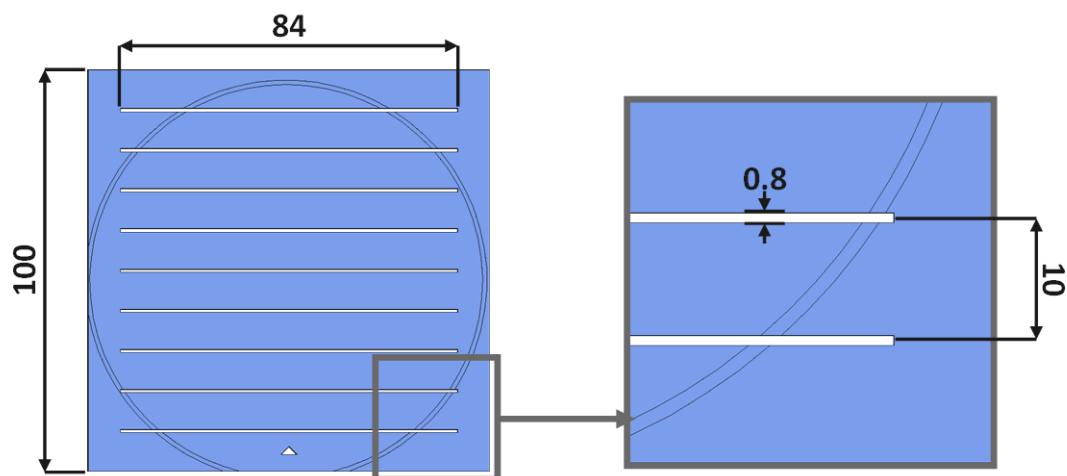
Design of a cutting tool for 1 cm wide PI film samples.
